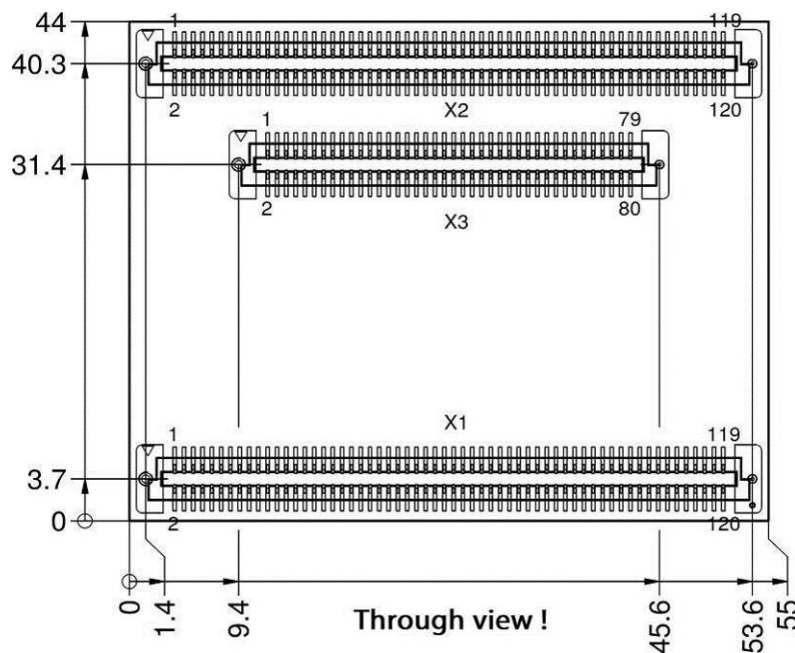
TQMa7x dimensions, top view through TQMa7x
